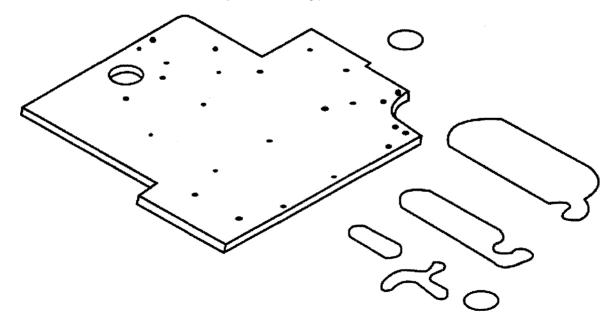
Casting Sealing O-rings & Seal Plate (P/N 20126)
